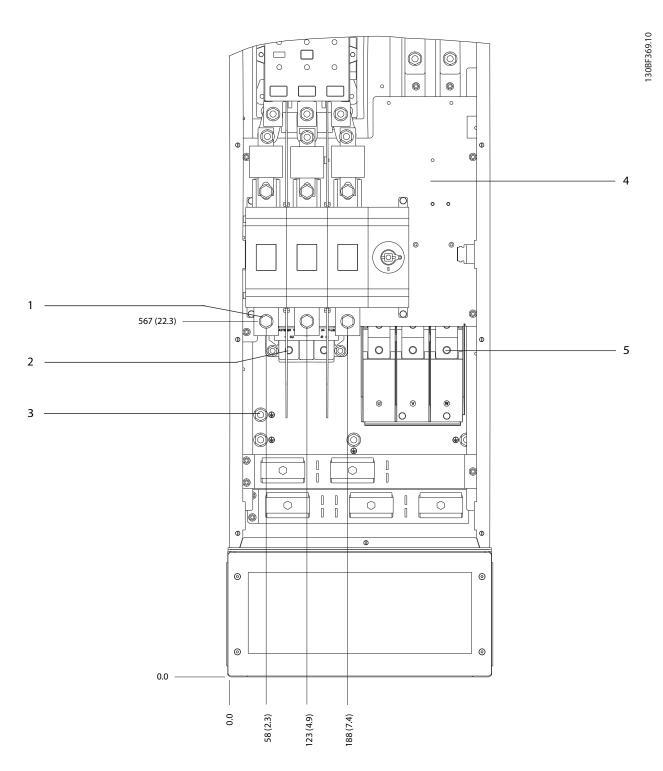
D8h Terminal Dimensions with Contactor Option (Front View)
